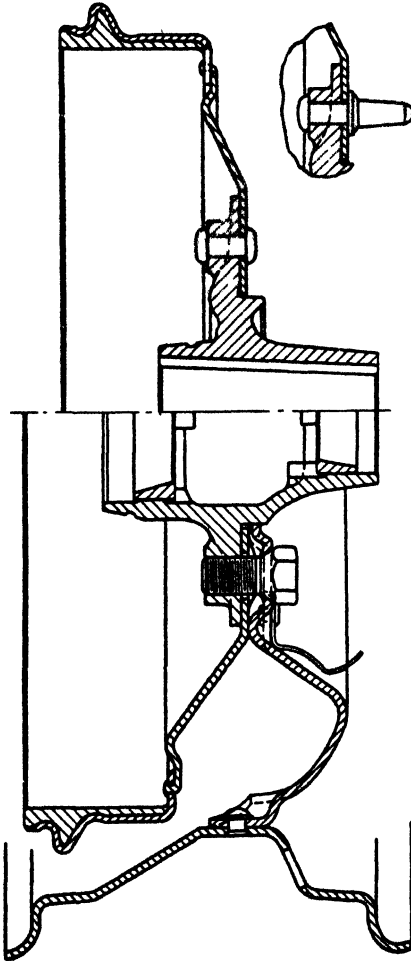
DISC-TYPE PASSENGER-CAR WHEEL (MOTOR WHEEL).
